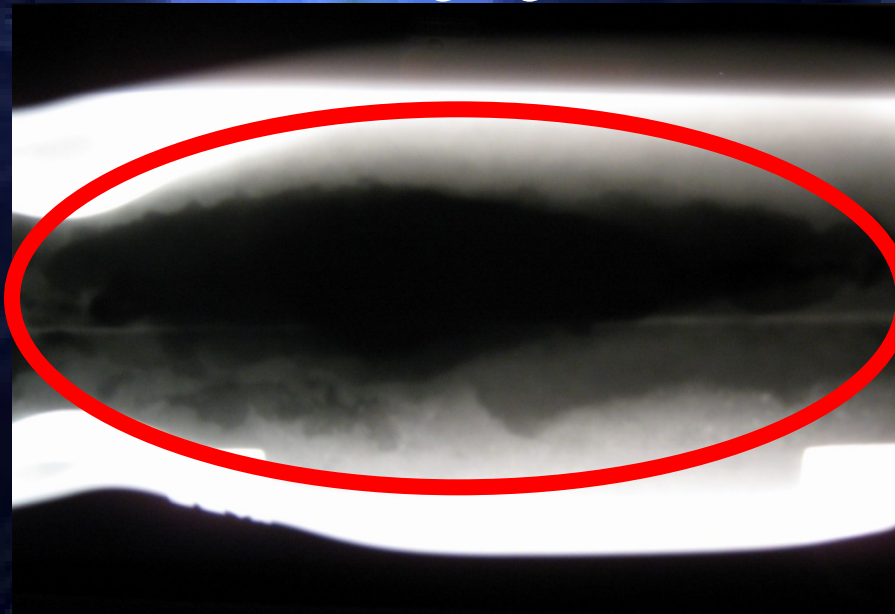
X –Ray photo of the failed tube revealed heavy damage due to the corrosion phenomena on the internal surface of the tube with severe reduction in thickness as shown in the red circle.
